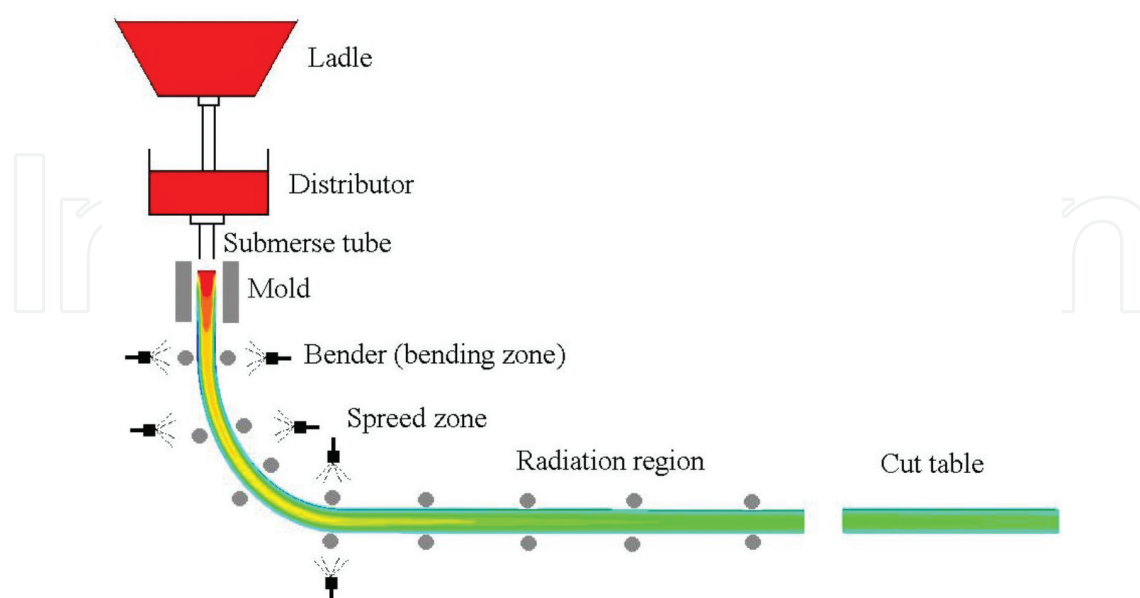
Schematic view of coupling of ladle feeding, tundish and continuous casting process and facilities.
